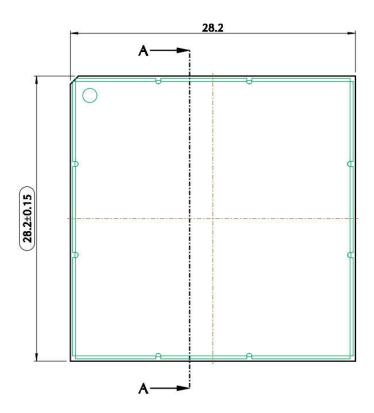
LE910C1-APX Mechanical Dimensions (Top view) with frame and cover shield design
